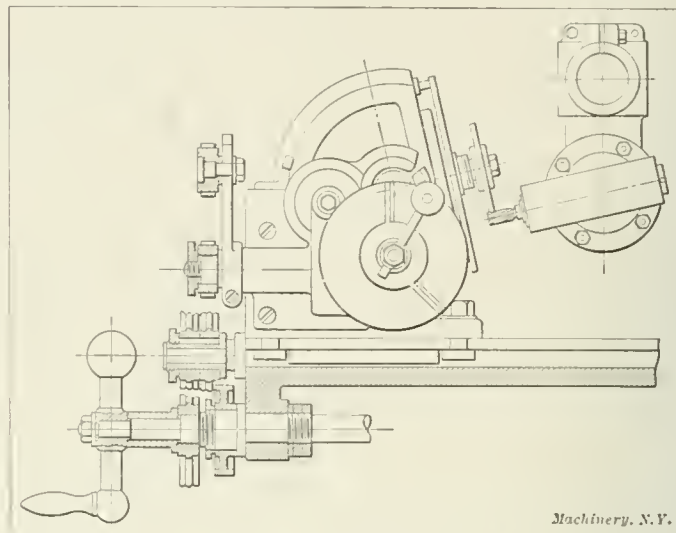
Diagrammatical View showing Method of Milling Cam on the Milling Machine
